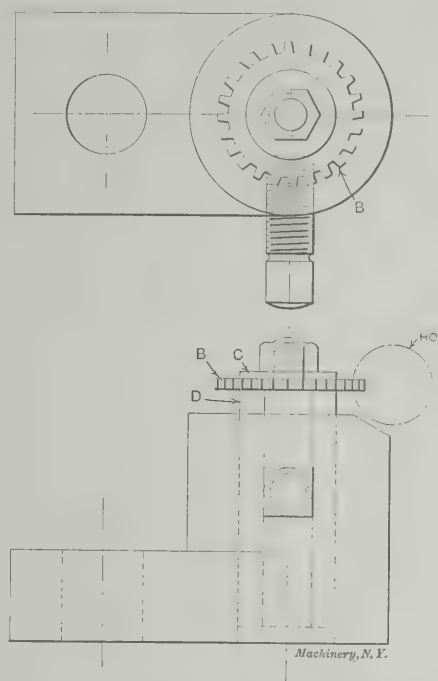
Fixture for Hobbing Small Worm Wheels in the Lathe
